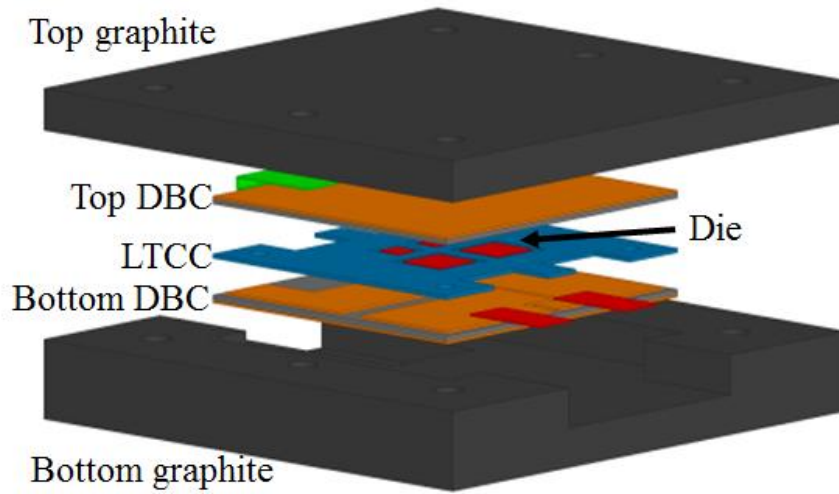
Exploded view of the assembly to fabricate the stand-alone power modules
